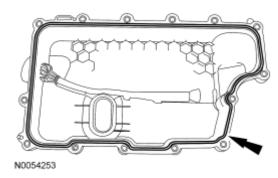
Inspecting Transaxle Main Control Cover Seal For Damage Courtesy of FORD MOTOR CO.
